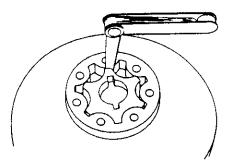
Position pumping element as shown to check tooth clearance. Refer to text.
